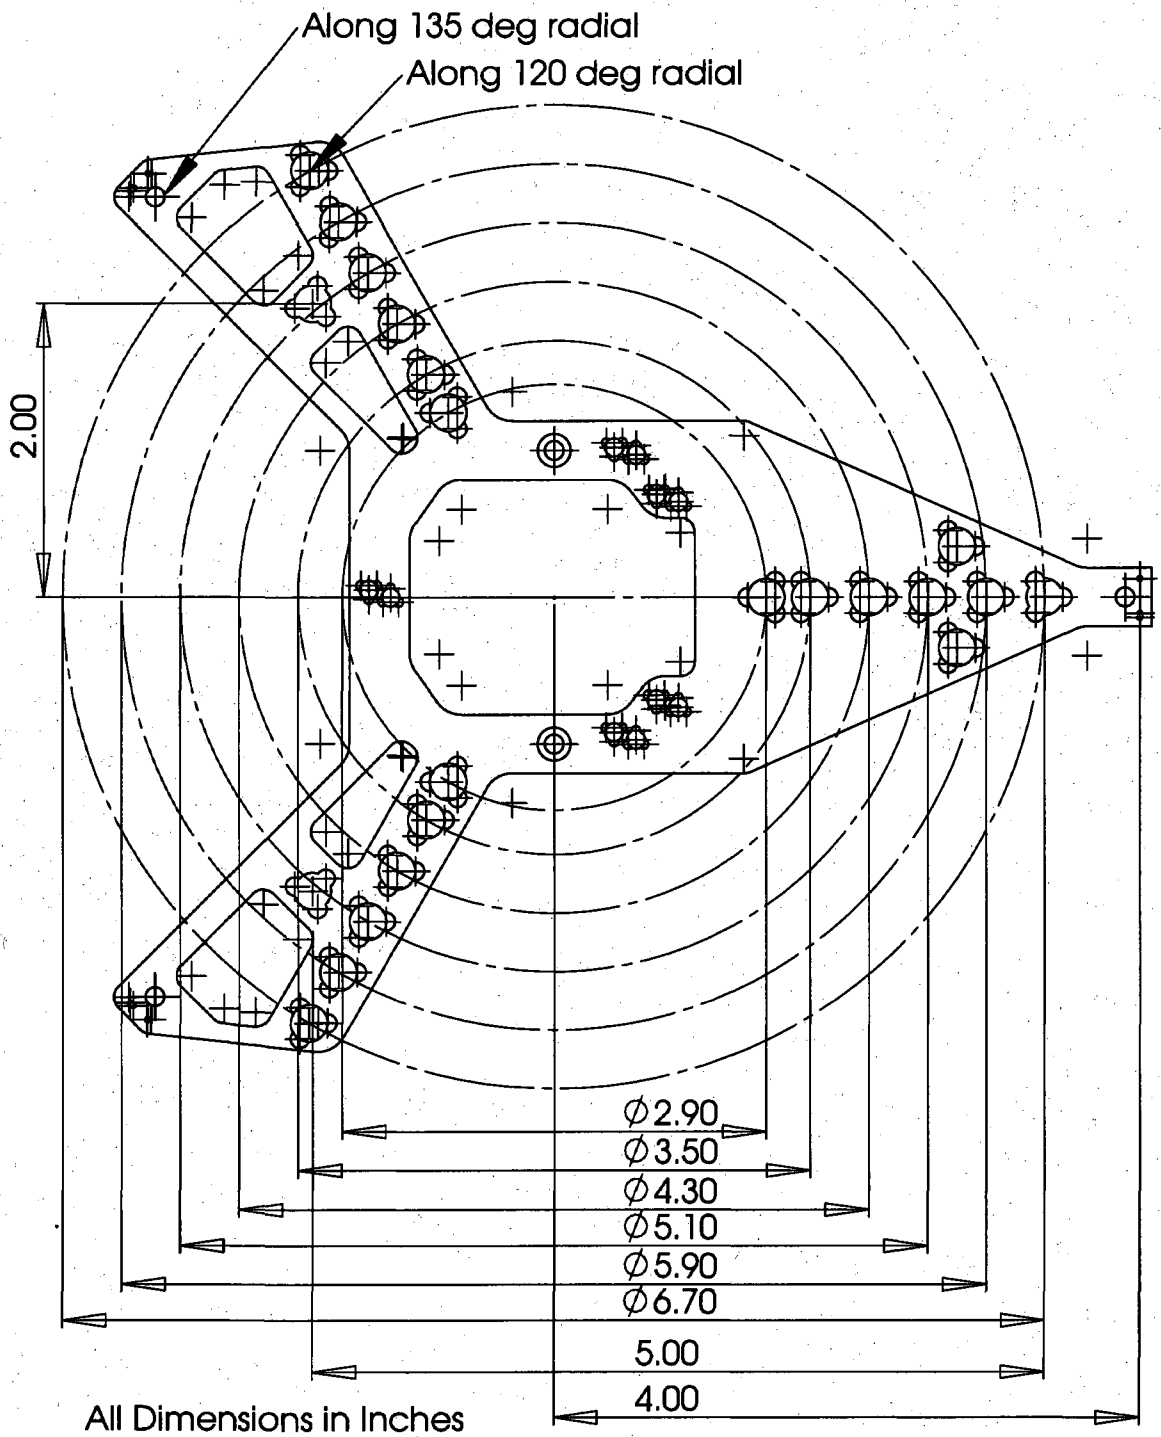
Mechanical Drawing: Pendulum platform, calibration holes.
